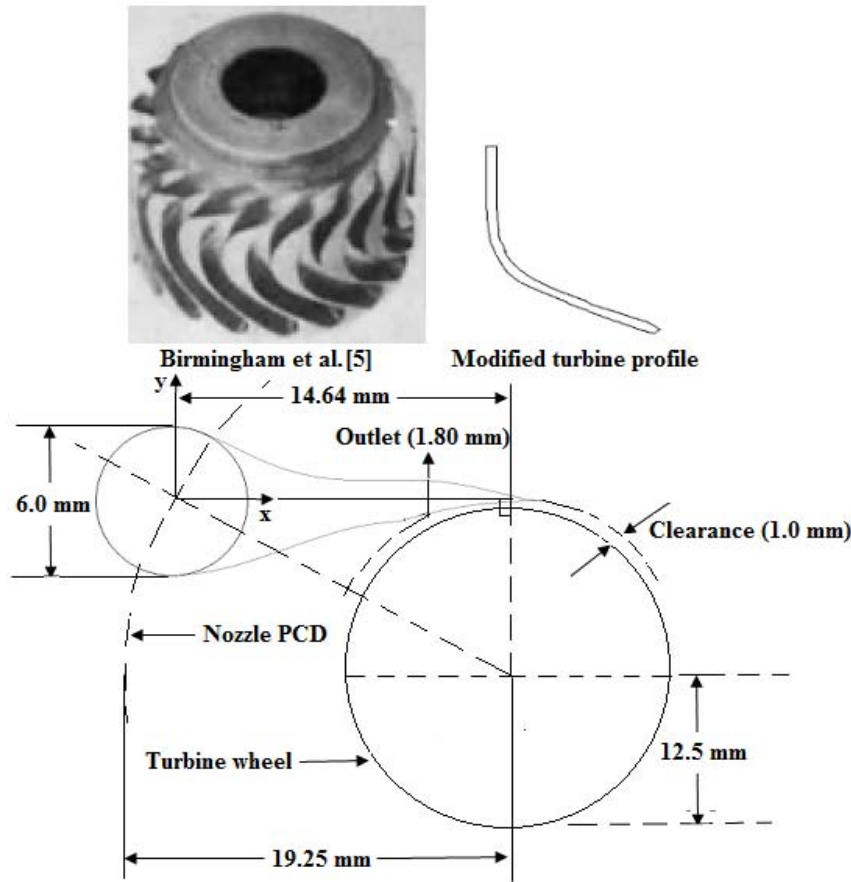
Schematic diagram of nozzle and turbine wheel [18].
